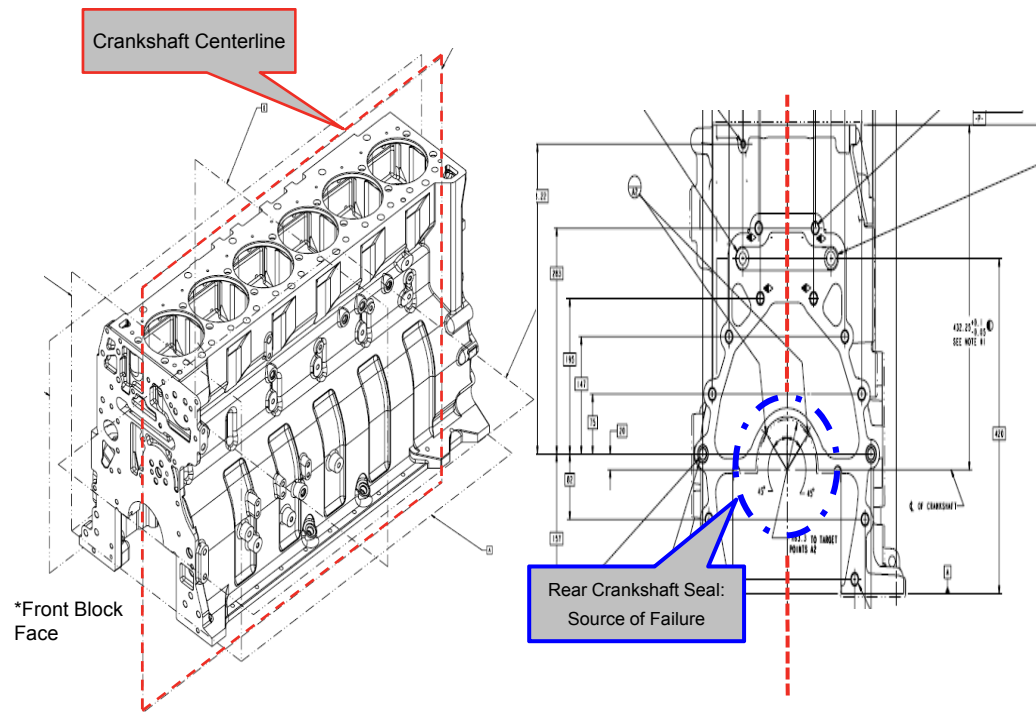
CAD drawing of the ISX 15 engine block.⁴
